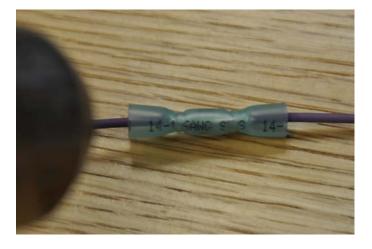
Use a heat gun or other heat source to reduce the tube to make a water proof seal.
